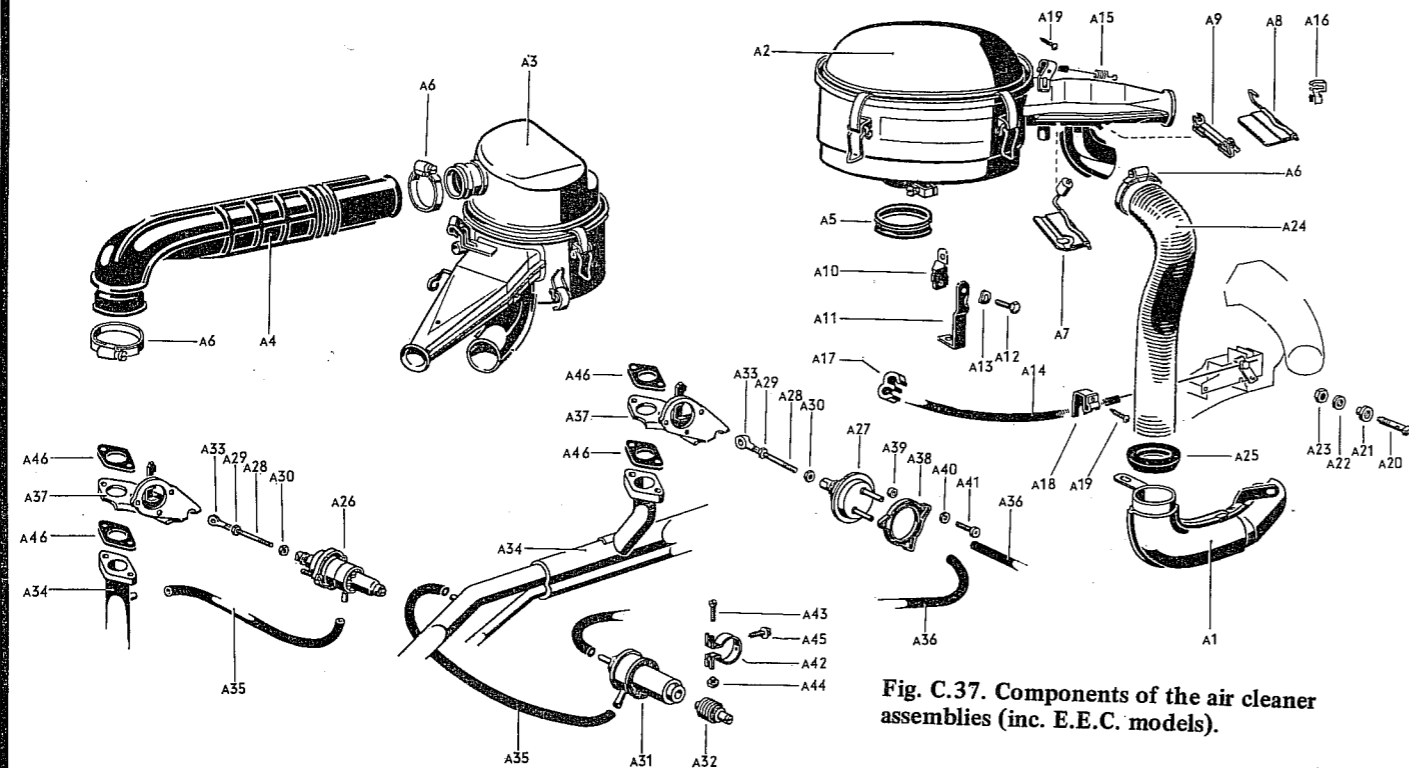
Components of the air cleaner assemblies (inc. E.E.C. models).
